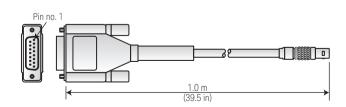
Mechanical dimension for DSUB 15-pin cable (87405C-103)
